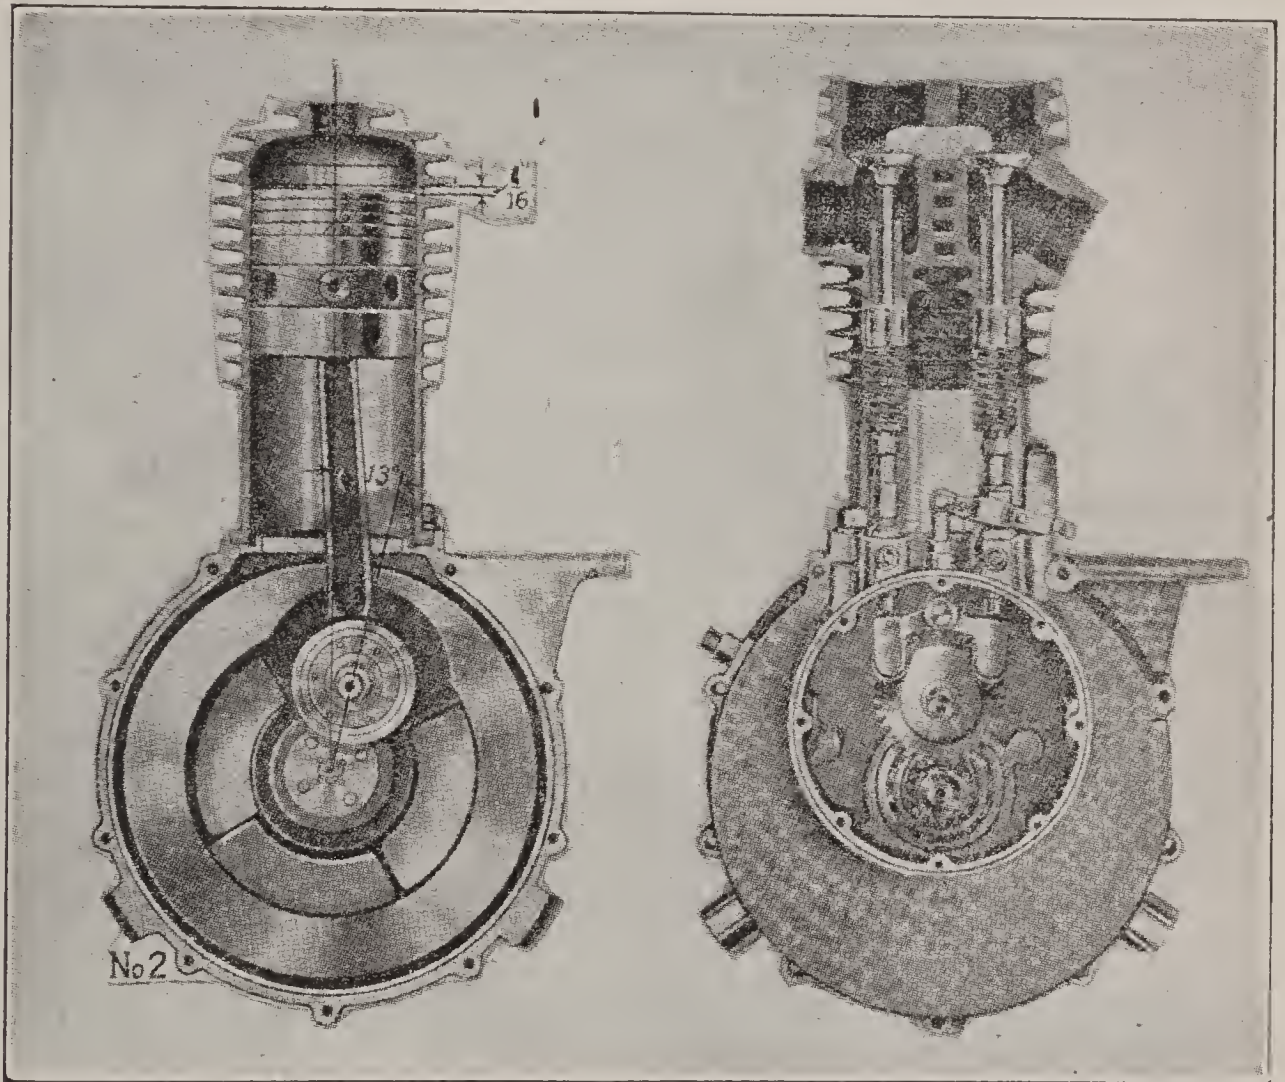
Sectional View Showing Point in Crank Pin Travel at Which Exhaust Valve is Fully Closed and When Inlet Valve Begins to Open.
